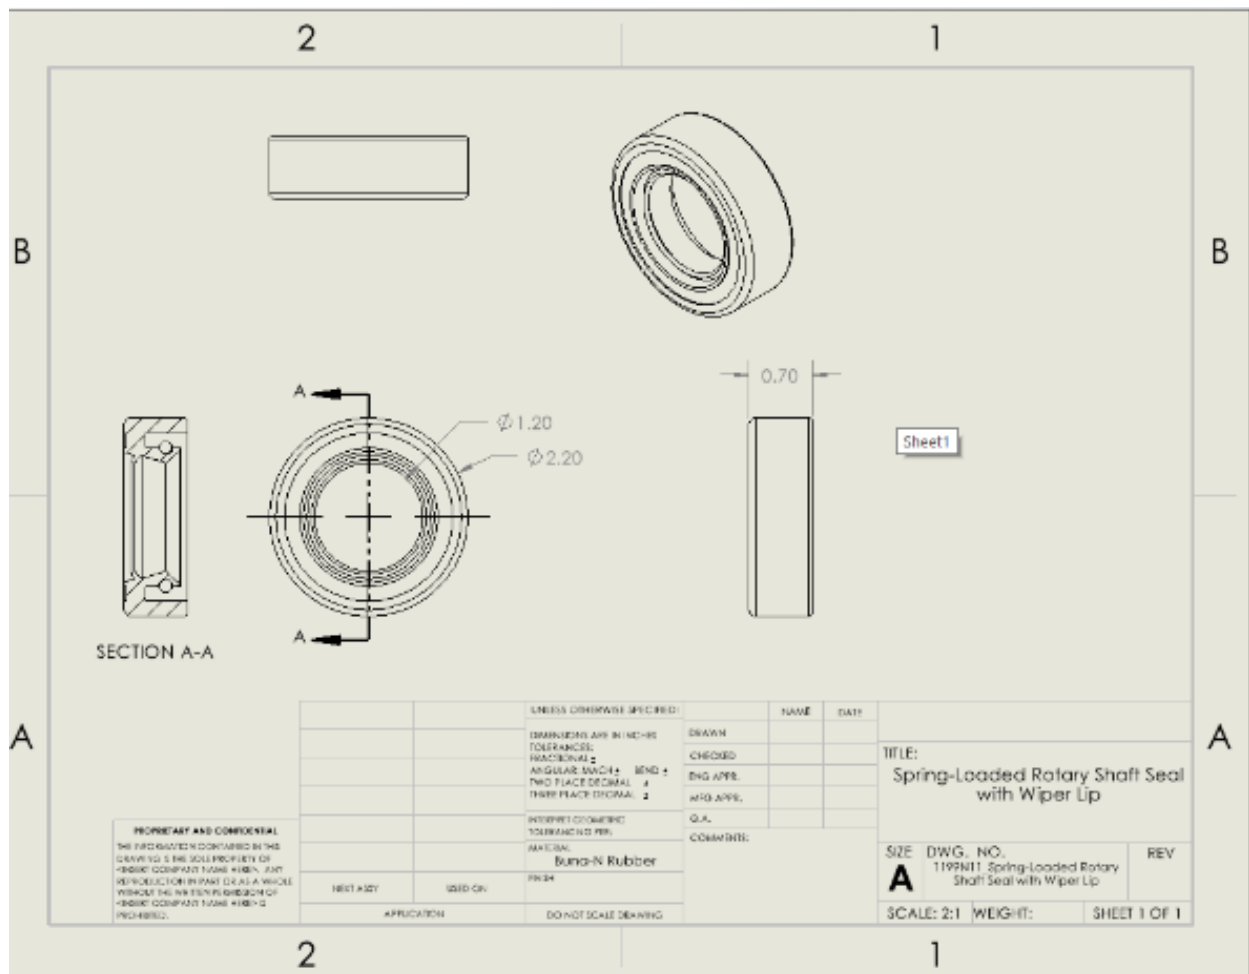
Input shaft spring-loaded rotary shaft seal drawing
